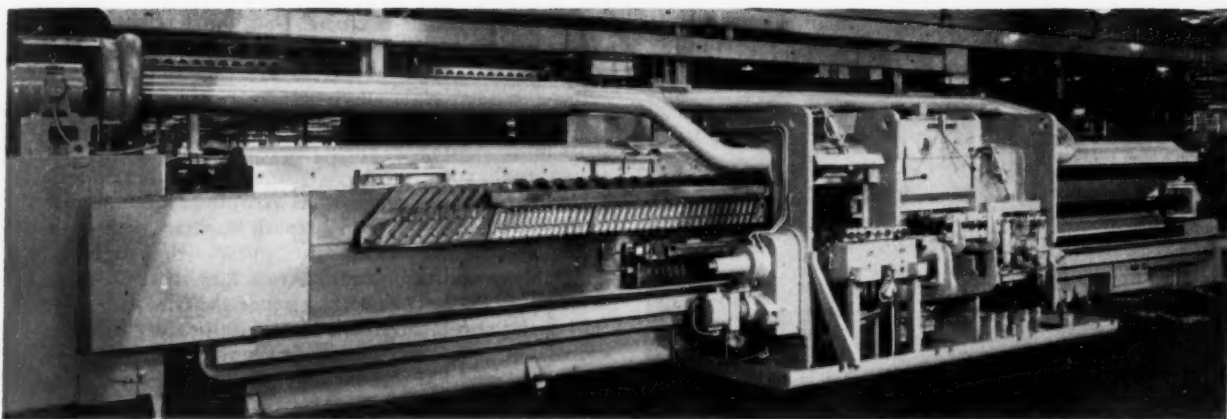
SPECIAL HORIZONTAL BROACHING MACHINE FOR BROACHING TOP, BOTTOM, MANIFOLD SIDE, AND VALVE-CHAMBER-COVER SIDE ON VALVE-IN-HEAD CYLINDER HEAD
